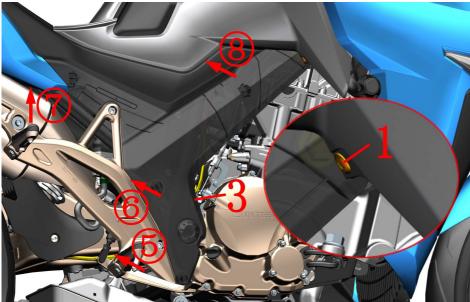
SIDE COVER COMPONENT		DE COVER	Side cover the lower part	CHK	Q
